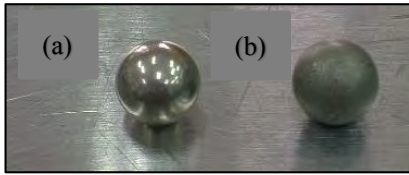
(a) Outer surface unboronized 316 stainless-steel ball bearing (b) Outer surface boronized 316 stainless-steel ball bearing
